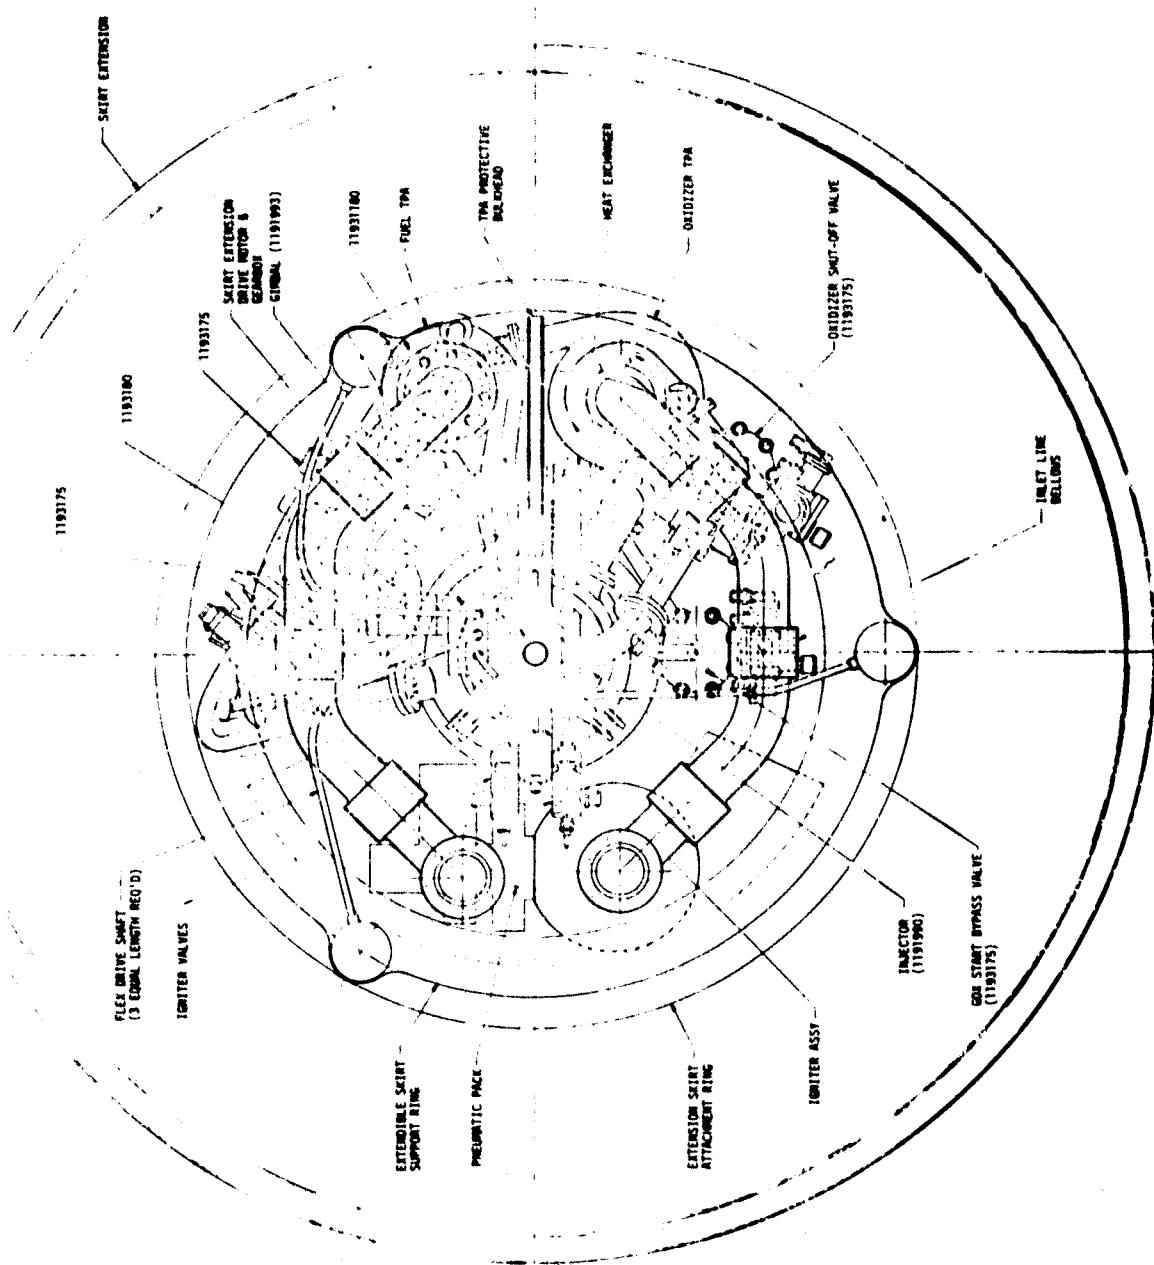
Engine Layout (ALRC Dwg. #1193100) (Sheet 1 of 3)
